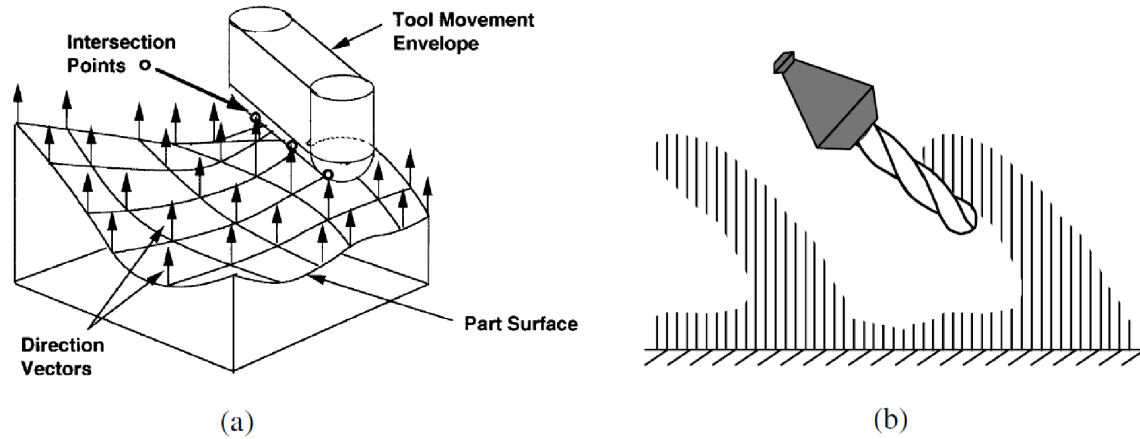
Z-buffer method to calculate cutter-workpiece engagement geometry (from [59]).
